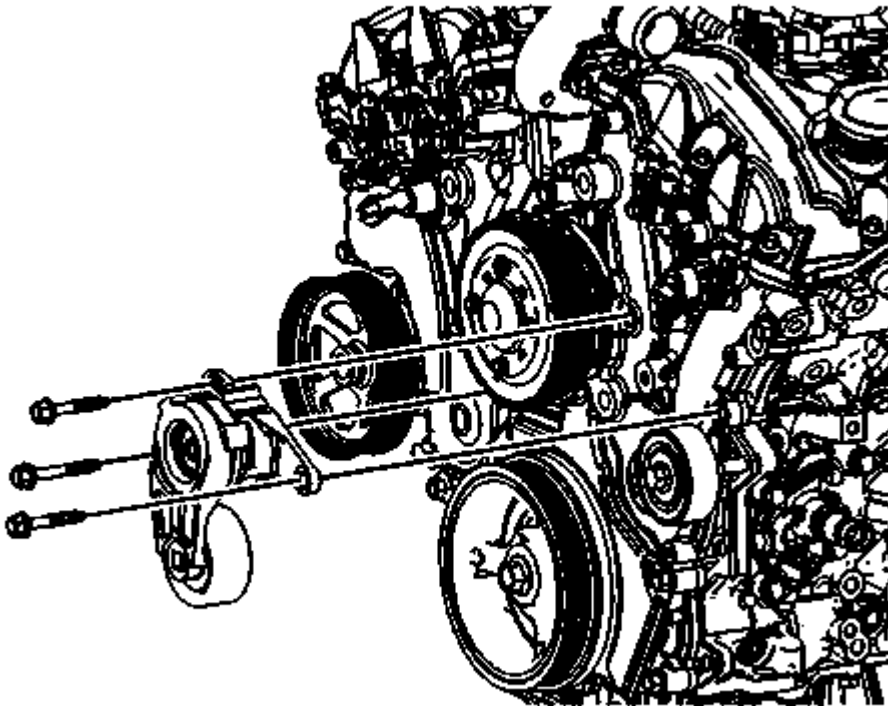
Identifying Drive Belt Tensioner Bracket Bolts
